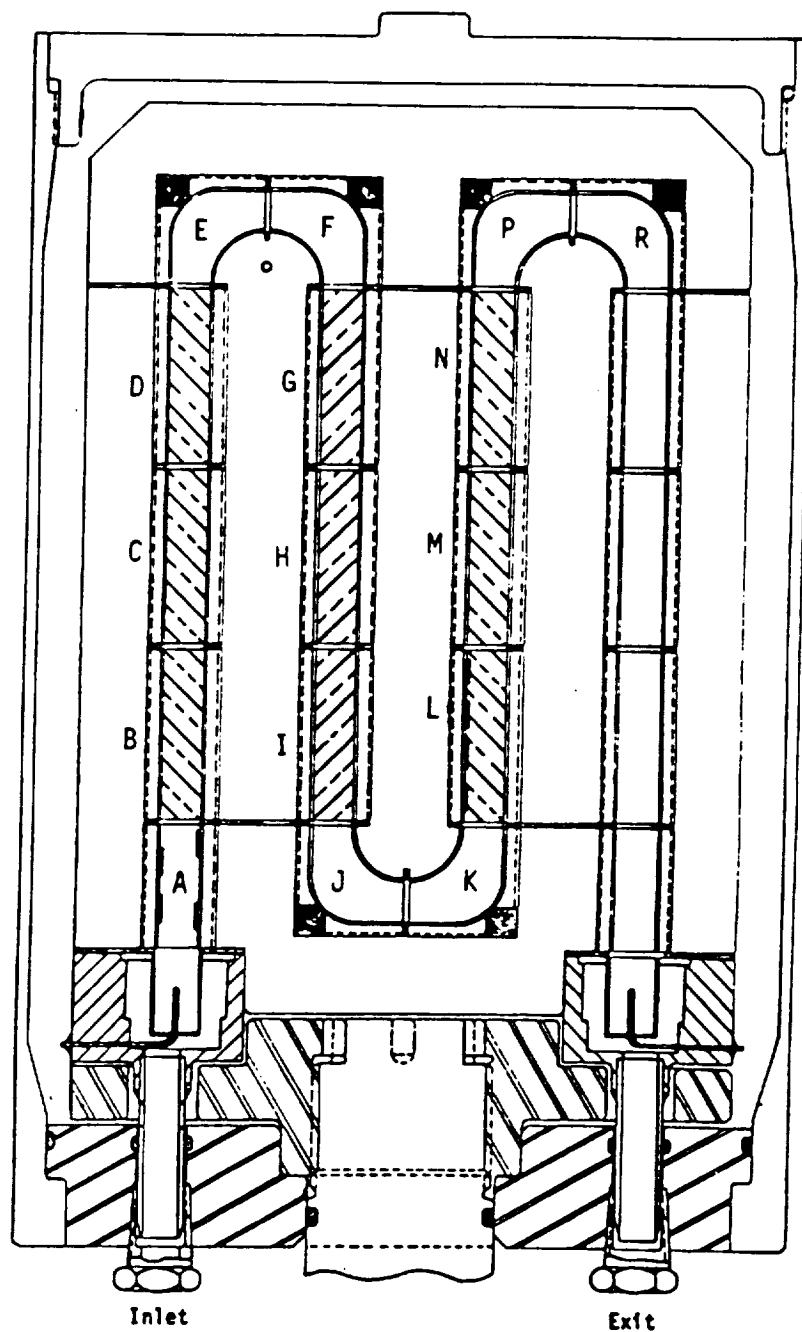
Cross Sectional View of Coolant Passage Heat Transfer Model Assembly With Skewed Trip Rough Walls
